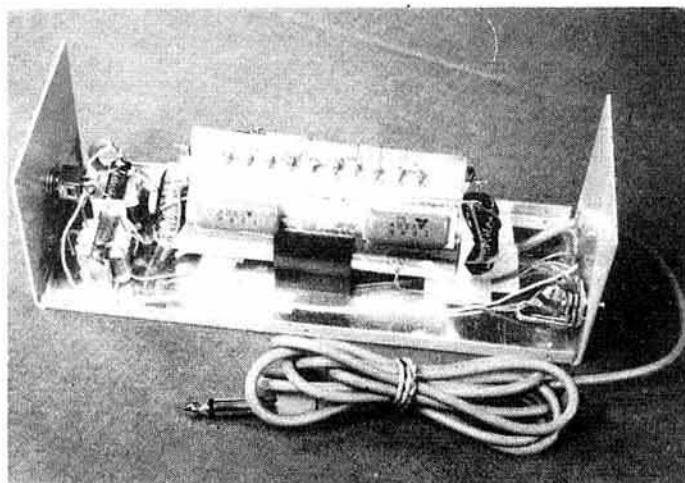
The assembled filter design No 7 installed in an aluminium box. The through-bypass switch and input/output transformers are at the left end of the box
